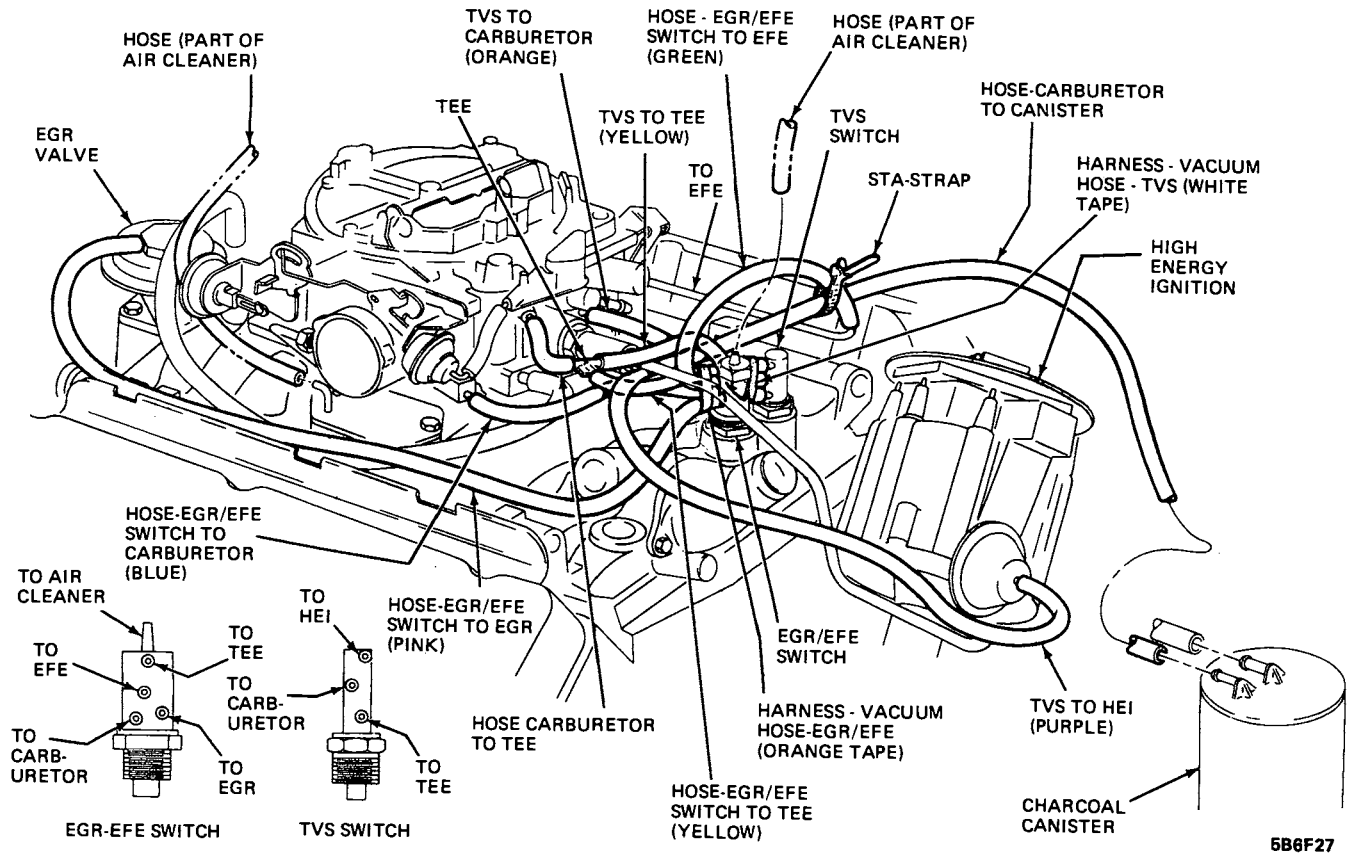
F-37 - 455 Engine Vacuum Hose Routing
